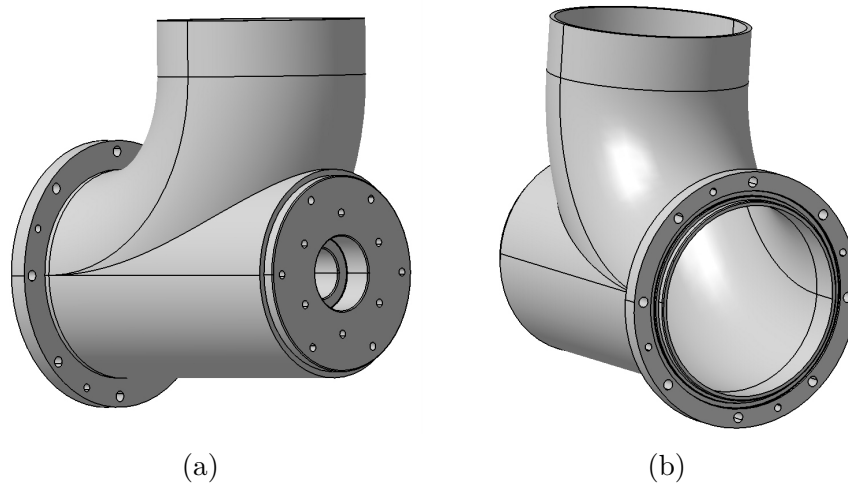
Geometry of the inlet block of the CRCC configuration used for the test bench (a) front view and (b) rear view
